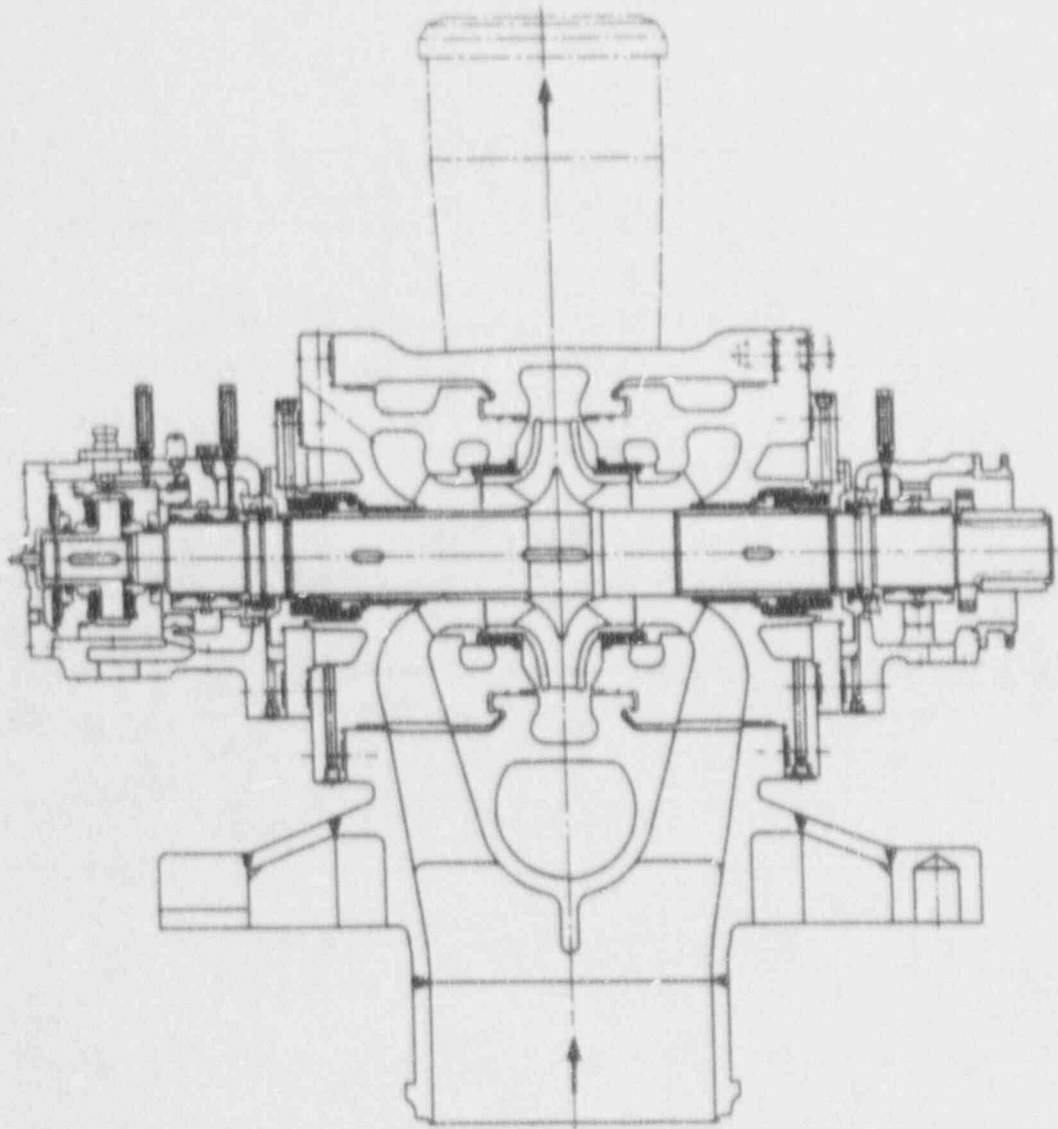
Boiler feed pump, main pump, casted casing (former main pump design).
